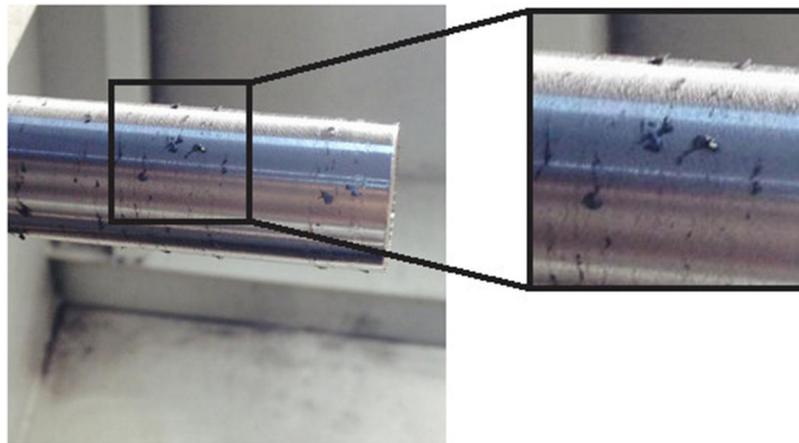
Machined surface using 70 wt% TiB₂ composite as cutting tool.
